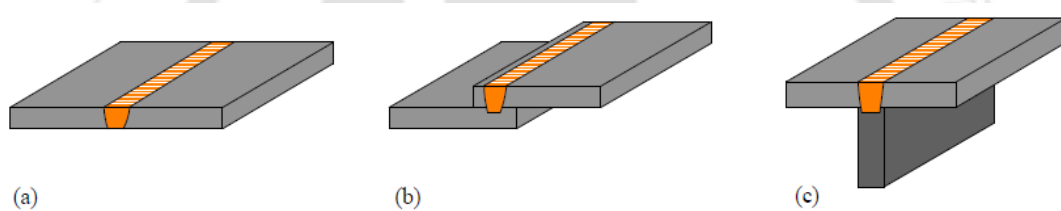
Common friction stir welding joint configuration (a) square butt, (b) lap, and (c) tee joint.
